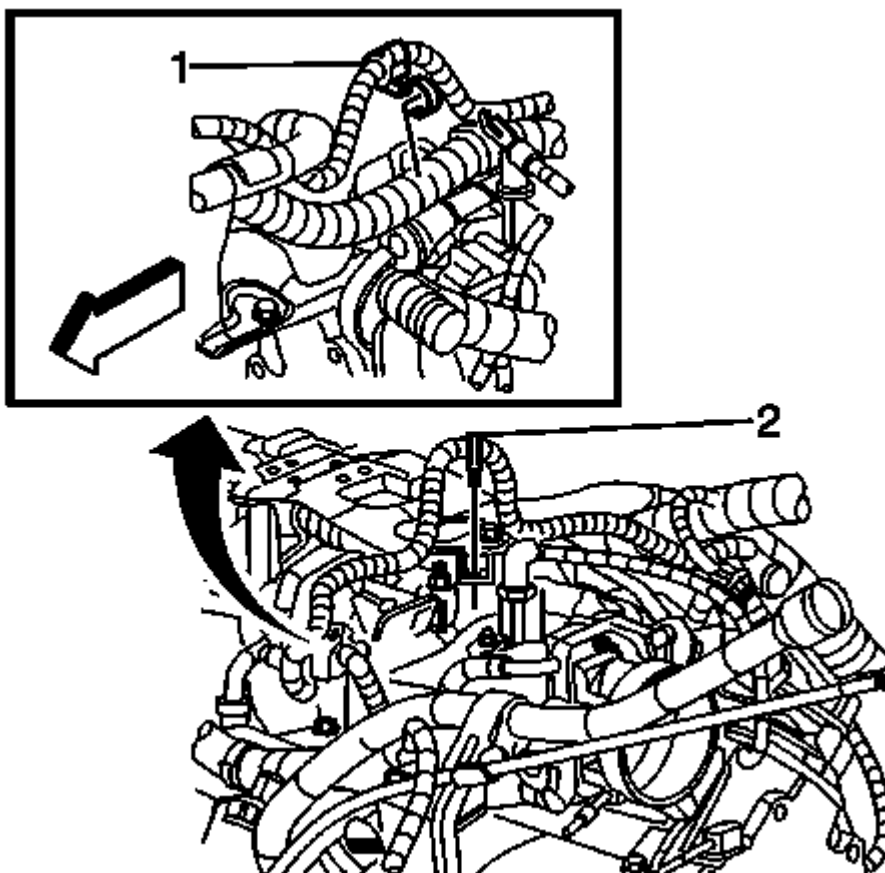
View Of Oil Level Indicator Tube & Seal
